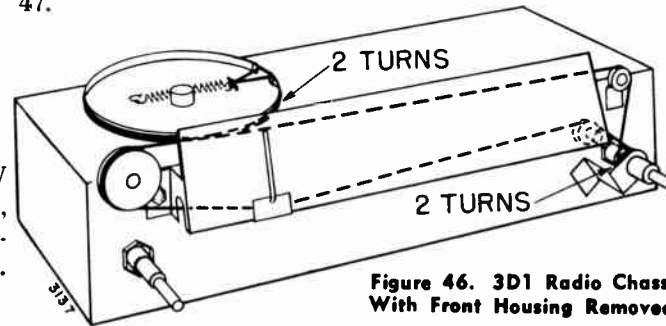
3D1 Radio Chassis With Front Housing Removed.
